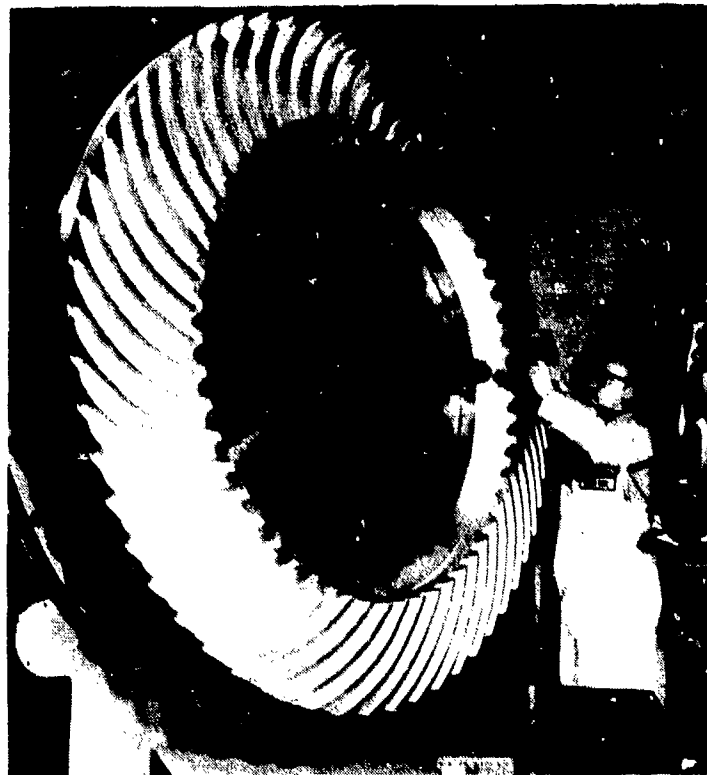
Large spiral-bevel gear is manufactured using rotary cutter method. Gears can be cut in the 50- to 80-in.-diam range with up to 12-in. face and 0.75-in.-diam pitch. Such gears can transmit 5000 to 6000 hp. (Courtesy of Philadelphia Gear Corp.)
